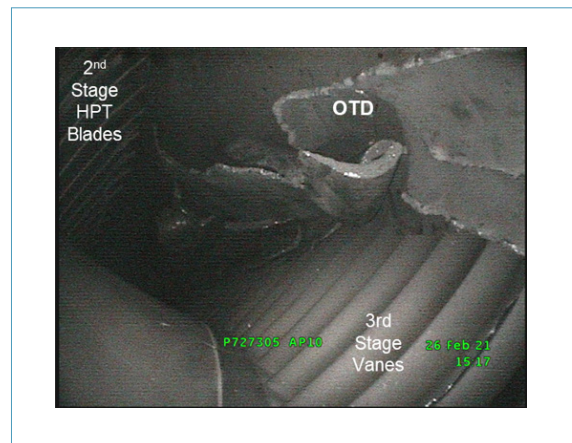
Picture of damaged outer transition duct, taken during borescope inspection. (Source: Pratt & Whitney)
